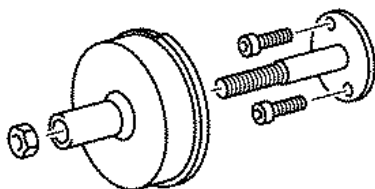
W904589041500 – Front Crankshaft Seal Installer
